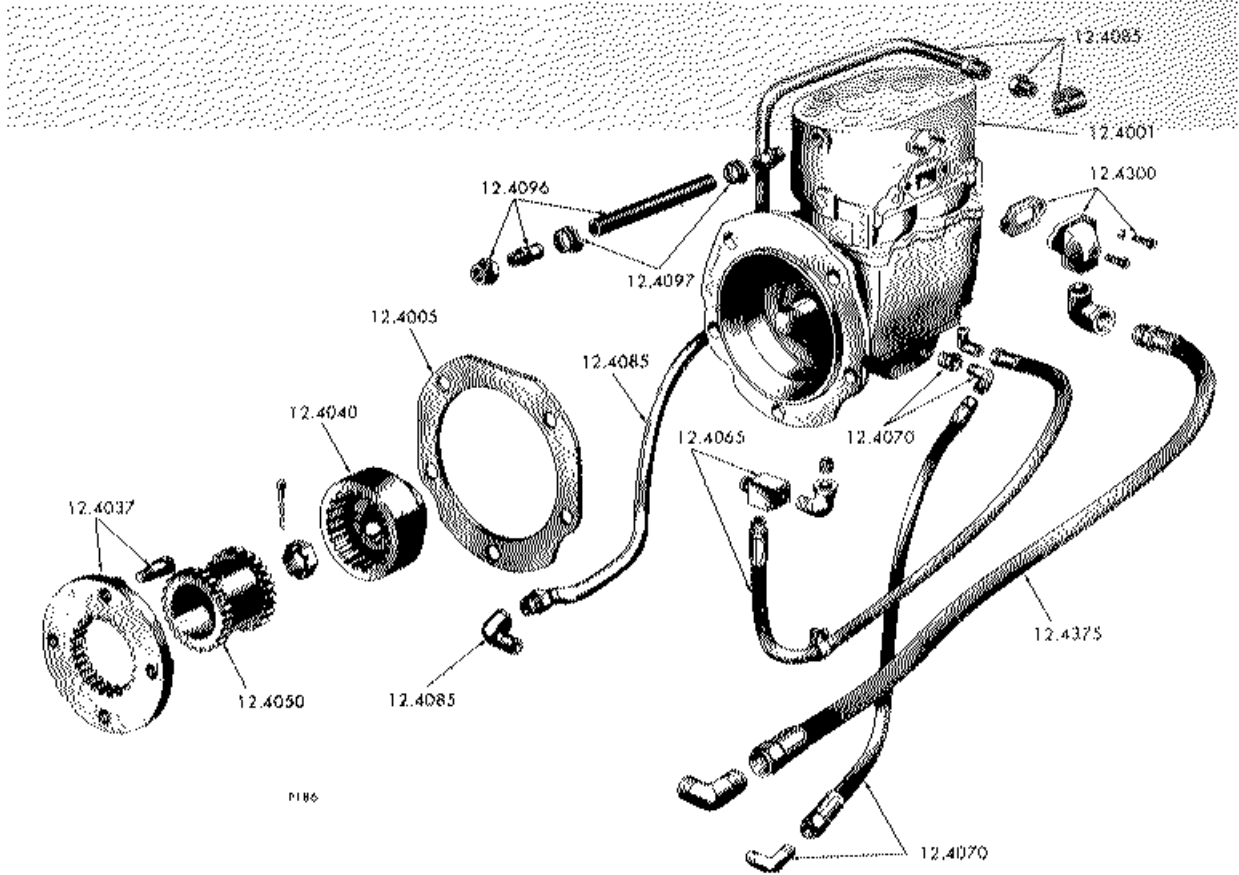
D AIR COMPRESSOR (Flange Mounted)
